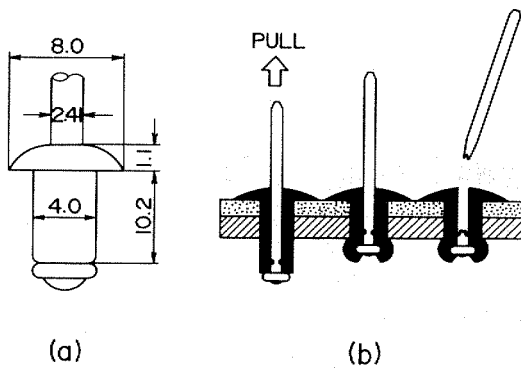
Shape and dimension of rivet (a) and the fastening method (b).
